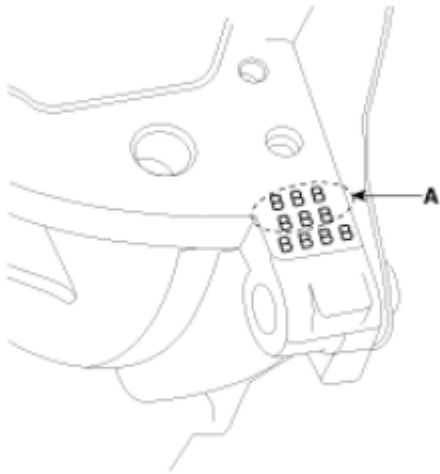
Locating Cylinder Bore Size Code On Cylinder Block
